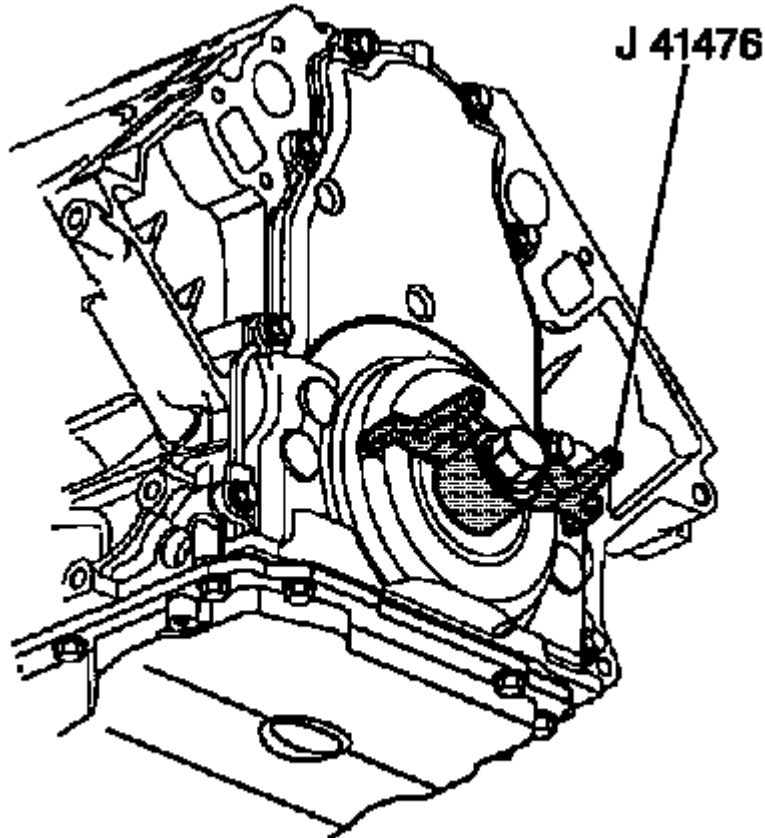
View Of Front Cover, Bolts & Gasket
